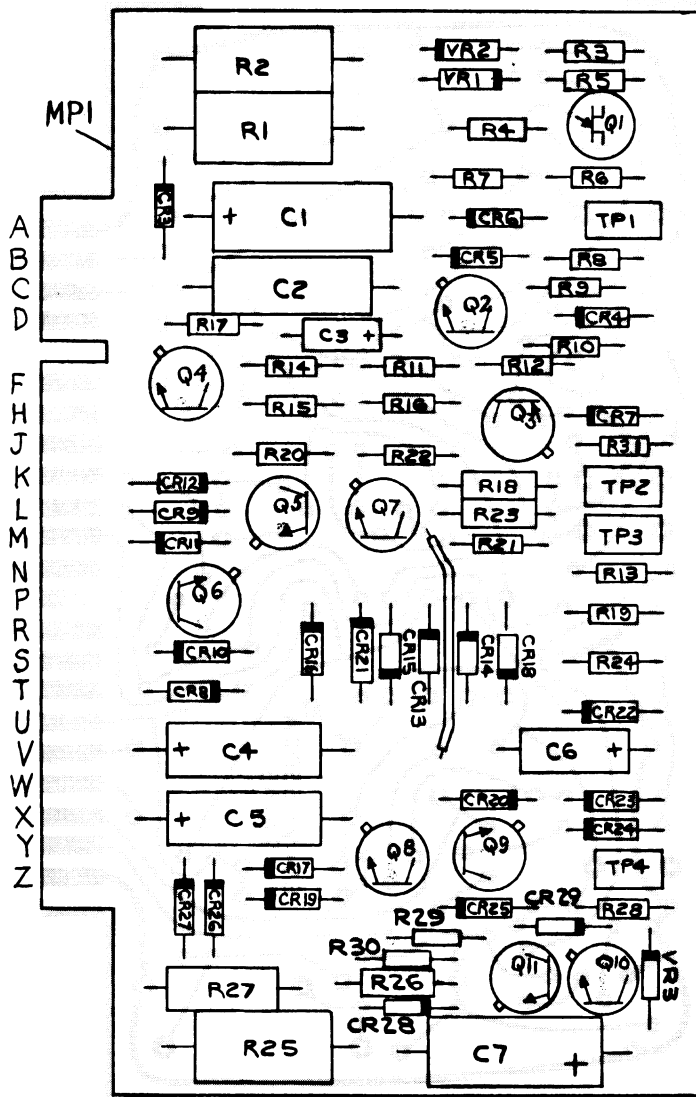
Printed Circuit Board 2A1A5, Component and Test Point Locations
